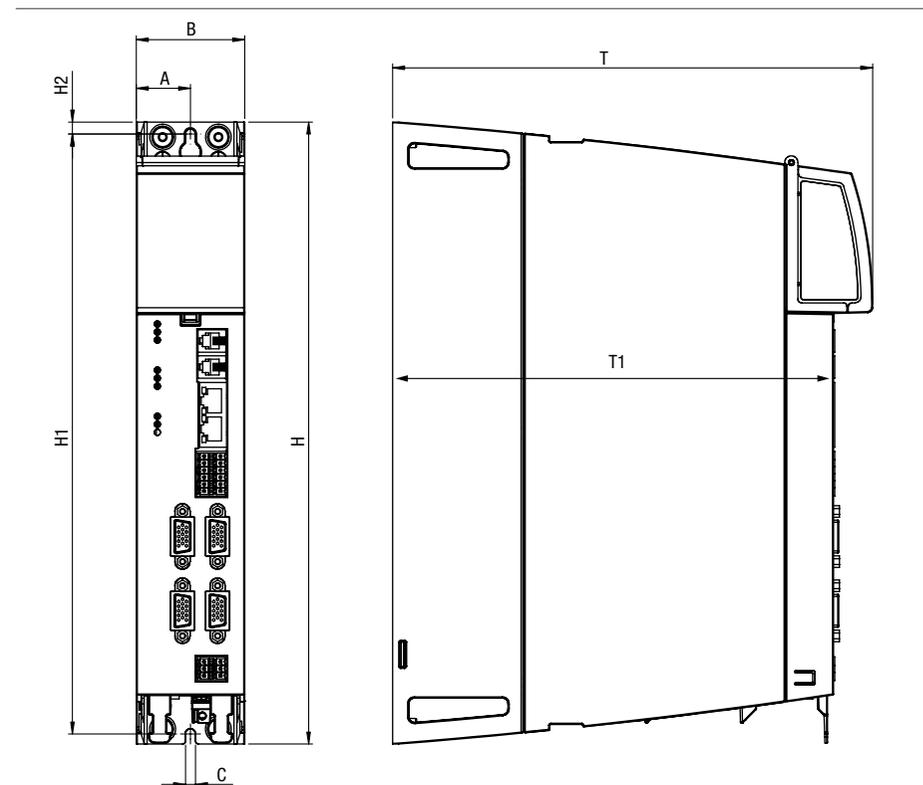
Dimensional drawing, ServoOne CM axis controller BG1
